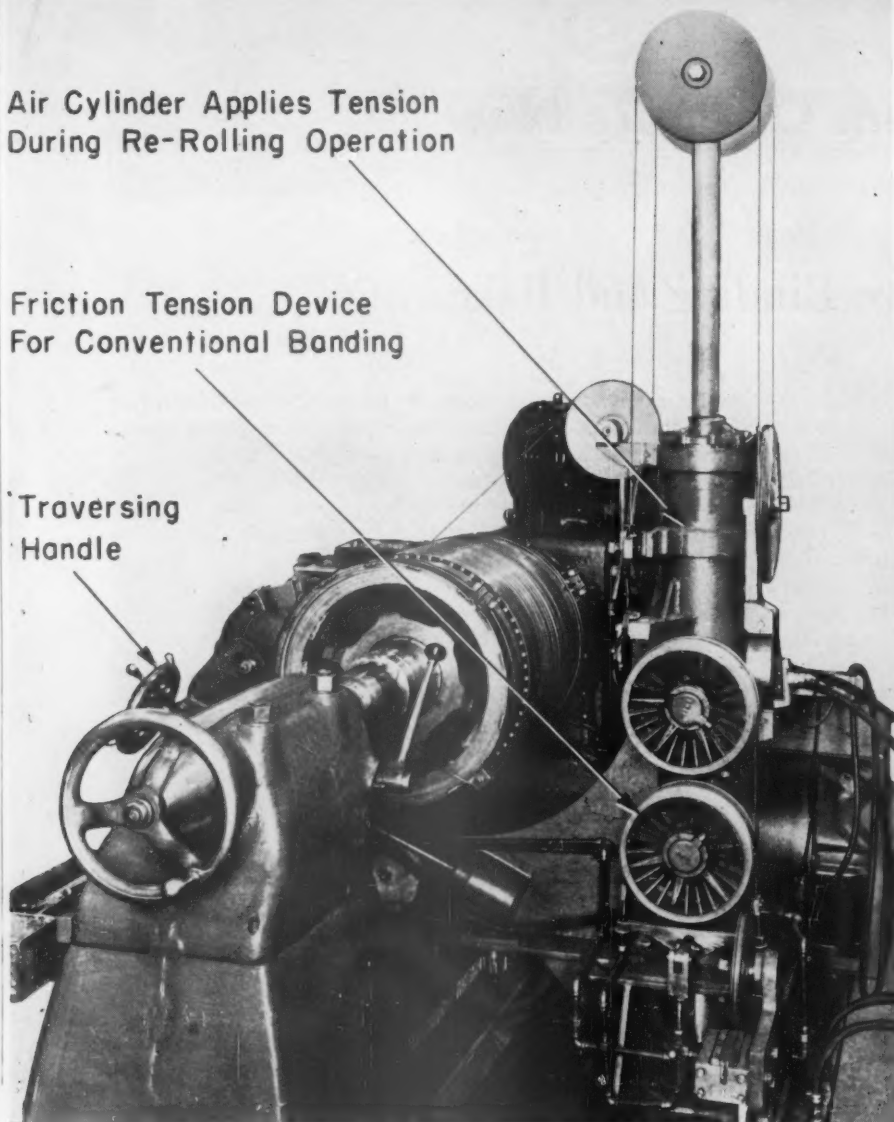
Lathe used for armature banding has been altered to make it possible to do rerolling. Originally machine was fitted with equipment to do only conventional tension banding.
